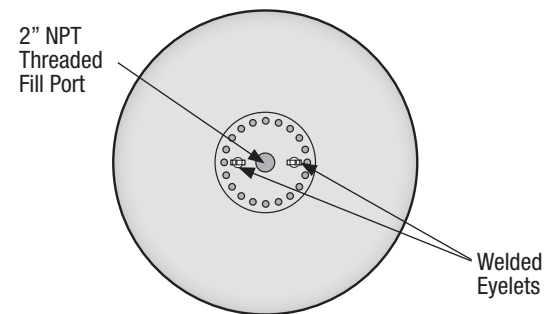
Plan view of the Pro Barrel[®] with heavy duty fill discharge plate. Bottom blank plate is the access hatch for cleanout.
